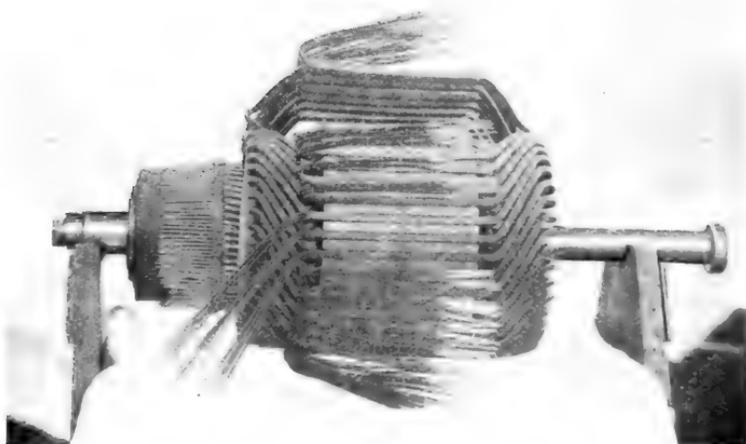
Commutator in place, with Coil Ends ready for Connection (Lahmeyer Co.).
